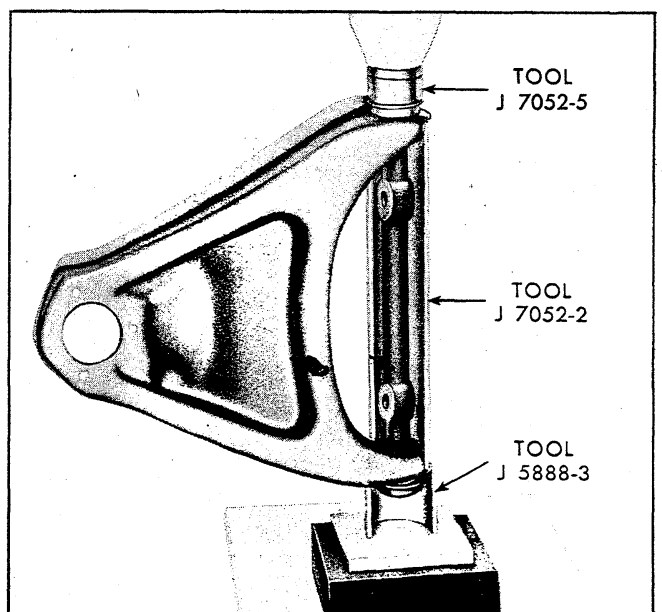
Installing Upper Control Arm Cross Shaft Bushing
